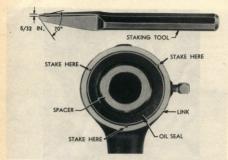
Oil Seal Staked in Link—Staking Tool Required
